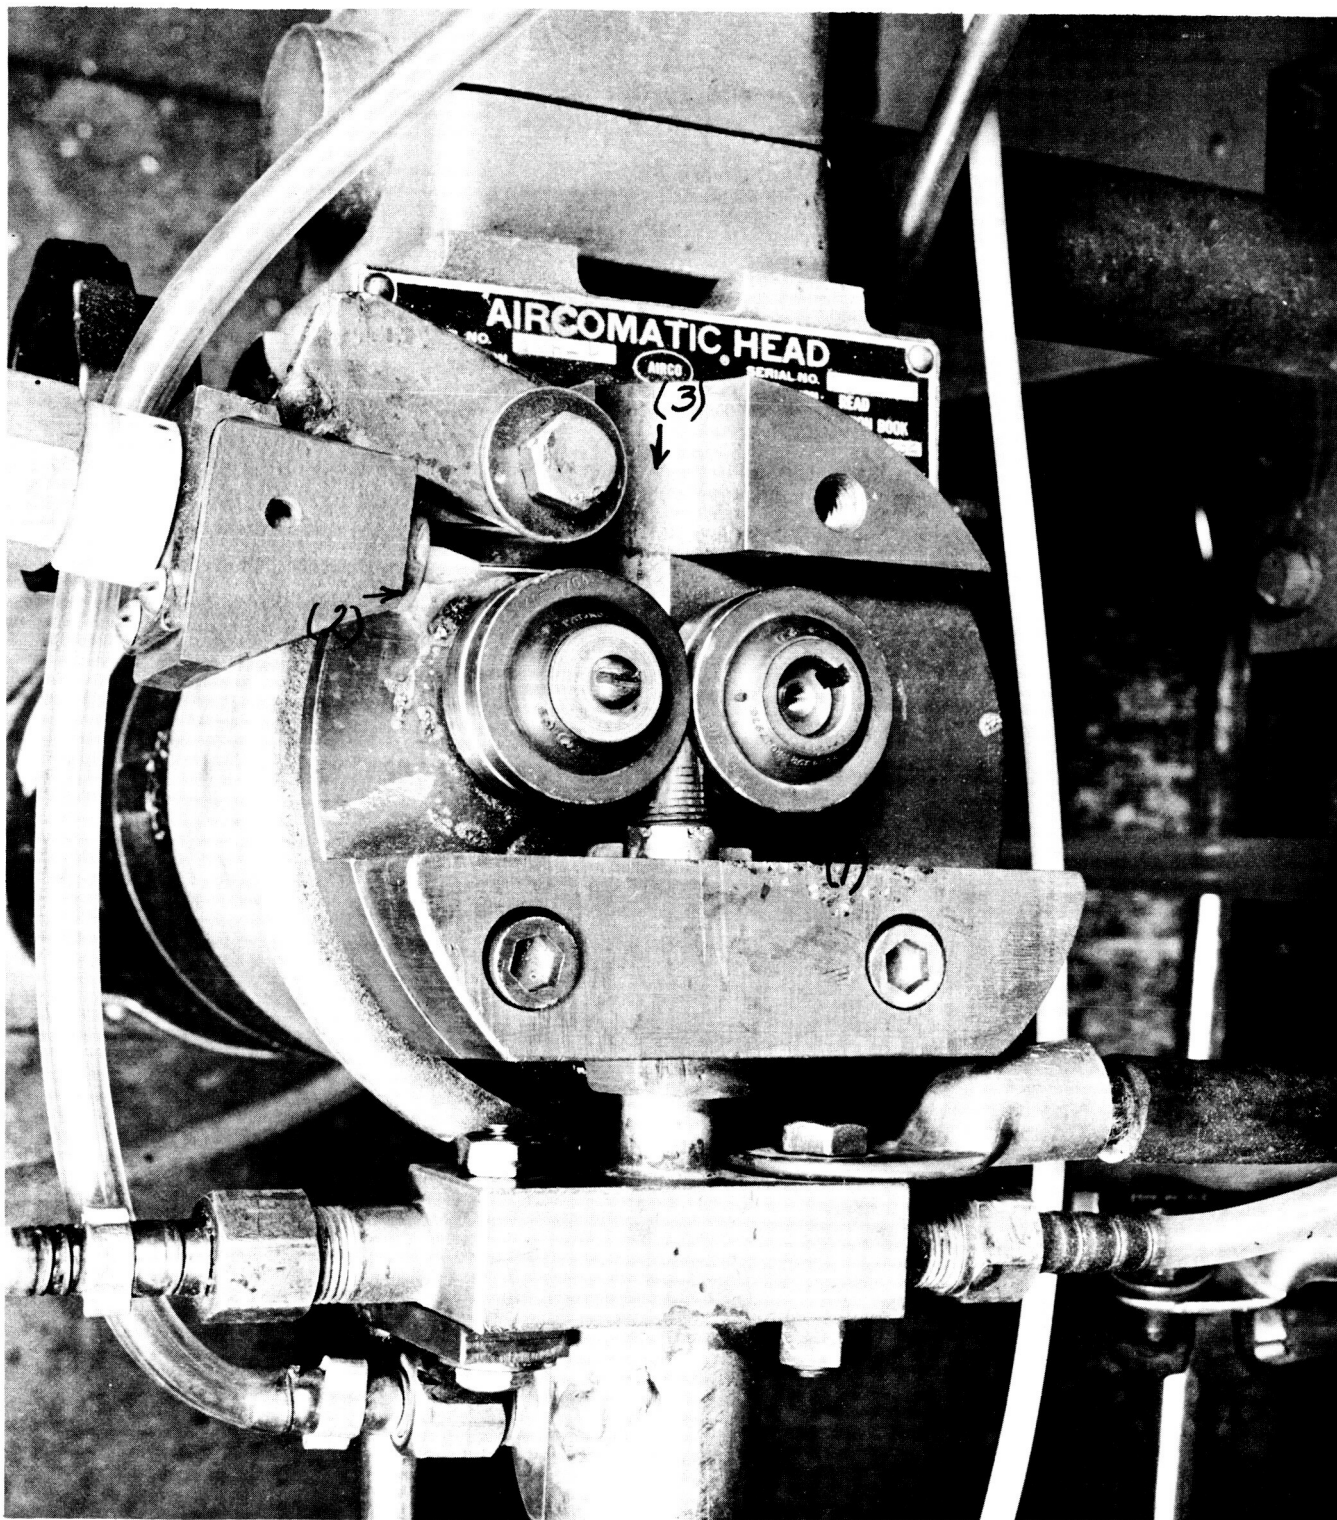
shows the controlled wire-cast system used on each of the welding heads during twin-wire studies.\* This setup caused the wire to be bent around one of the wire-drive rolls, entering the wire-feed rolls in a direction perpendicular to the contact tube. Bending the wire over one of the rolls puts a controlled cast in it. The direction of the cast is controlled so that the wire is directed toward the side of the joint as it exits from the contact tube.
